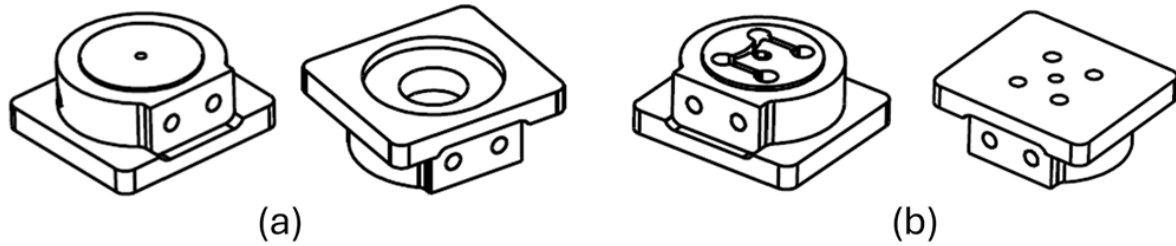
Drawing of the moulding part. Injection side (a) ejection side (b).
